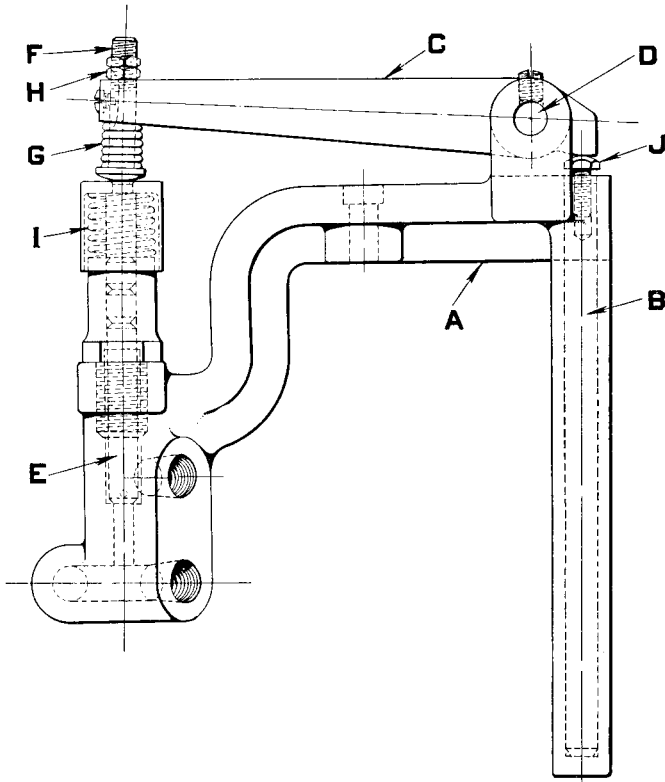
A*, Thermostat Casting; *B*, Expansion Rod; *C*, Lever; *D*, Fulcrum Pin; *E*, Valve; *F*, Adjusting Screw; *G*, Safety Spring; *H*, Locknuts; *I*, Overthrow Spring; *J*, Adjusting Screw.
